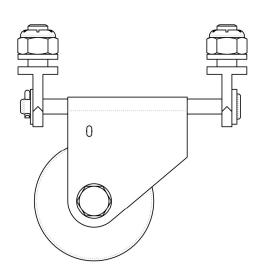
Parts Listings for Swivel Pulley Bracket Assembly, Float Mounted, 56-15240
